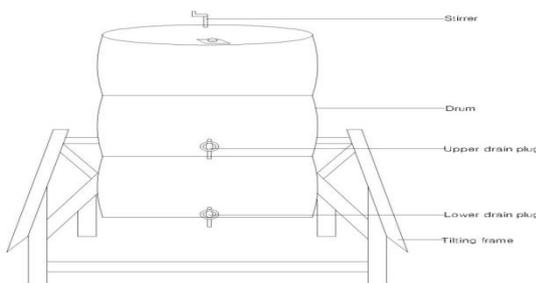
Pictorial drawing of the developed parboiler (Not to Scale)
